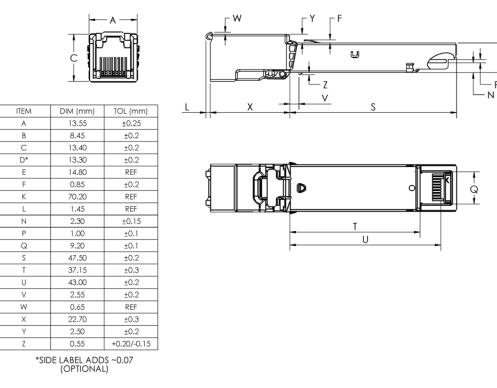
FCLF-8520/8521-3 mechanical dimensions
